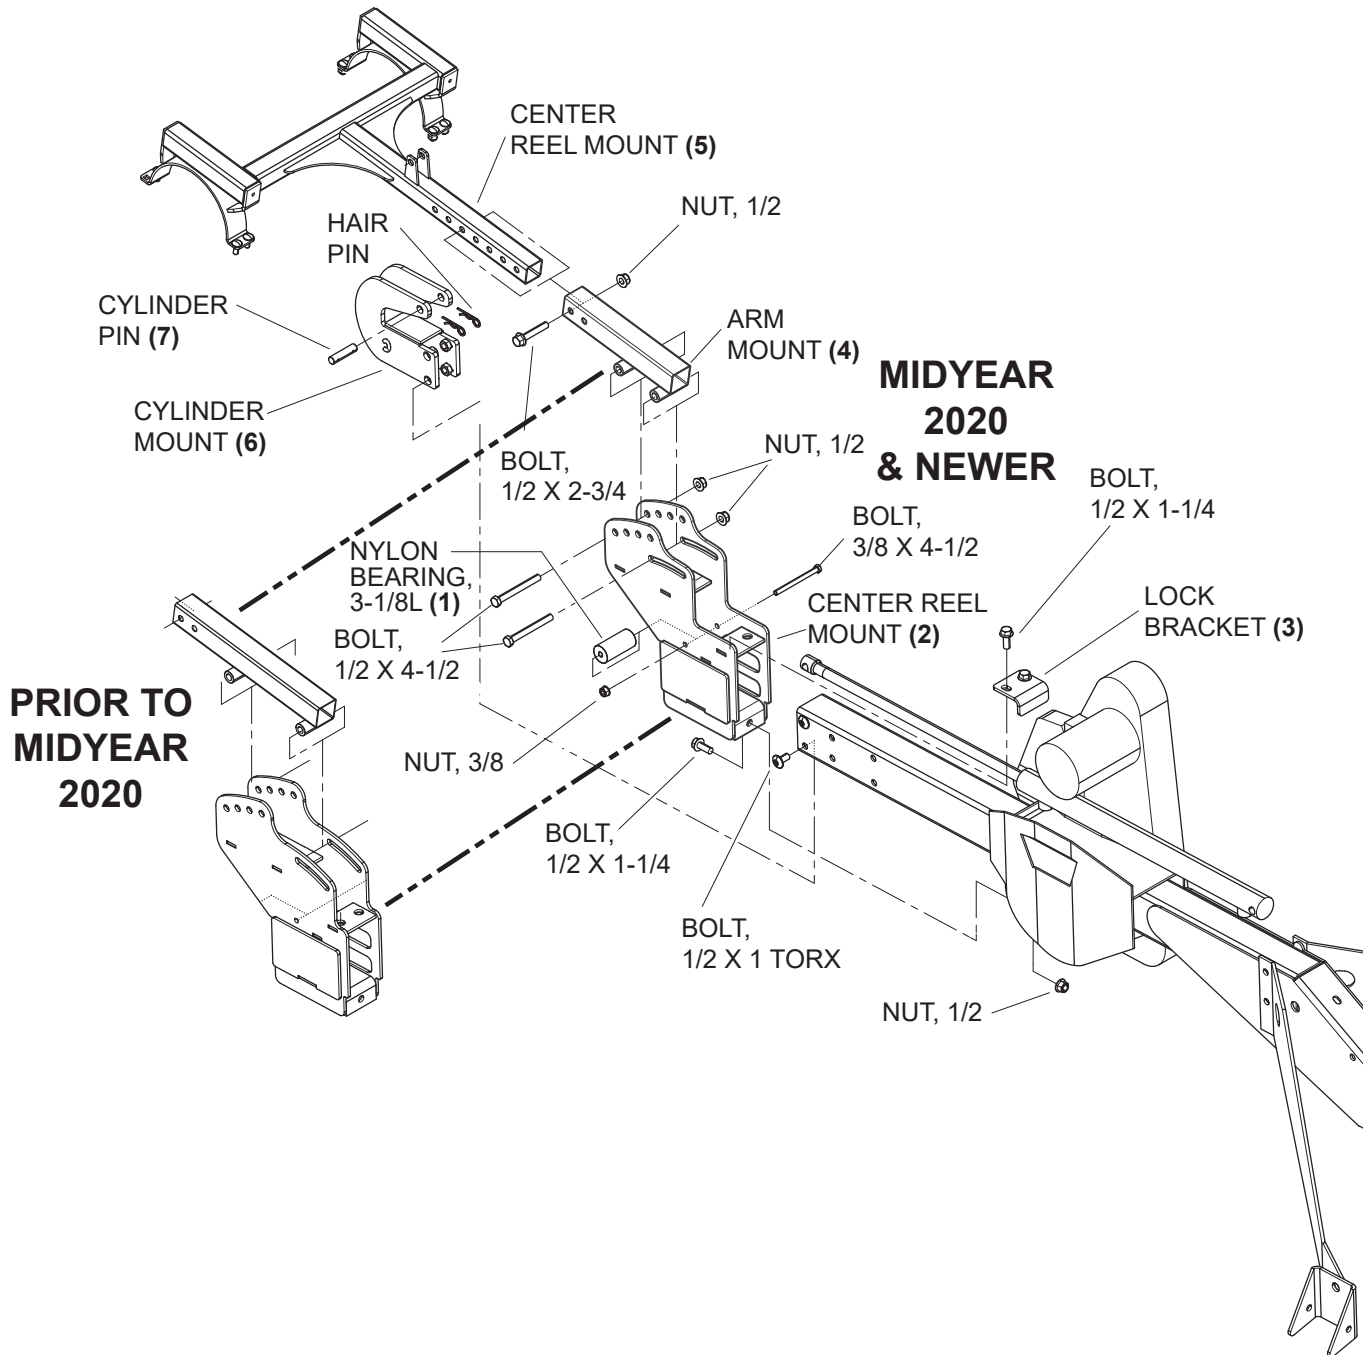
Center reel arm mount assembly (FD1 & FD75 headers)
